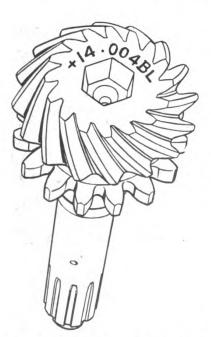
Spiral Bevel Gear and Clutch Shaft Showing Gauge and Back Lash Markings
